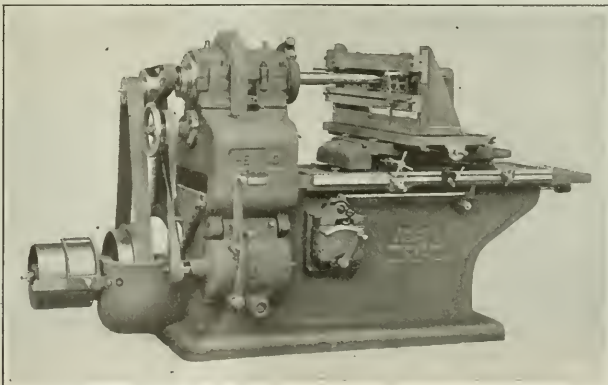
Style No. 50 Cylinder Grinding Machine made by the Heald Machine Co.
